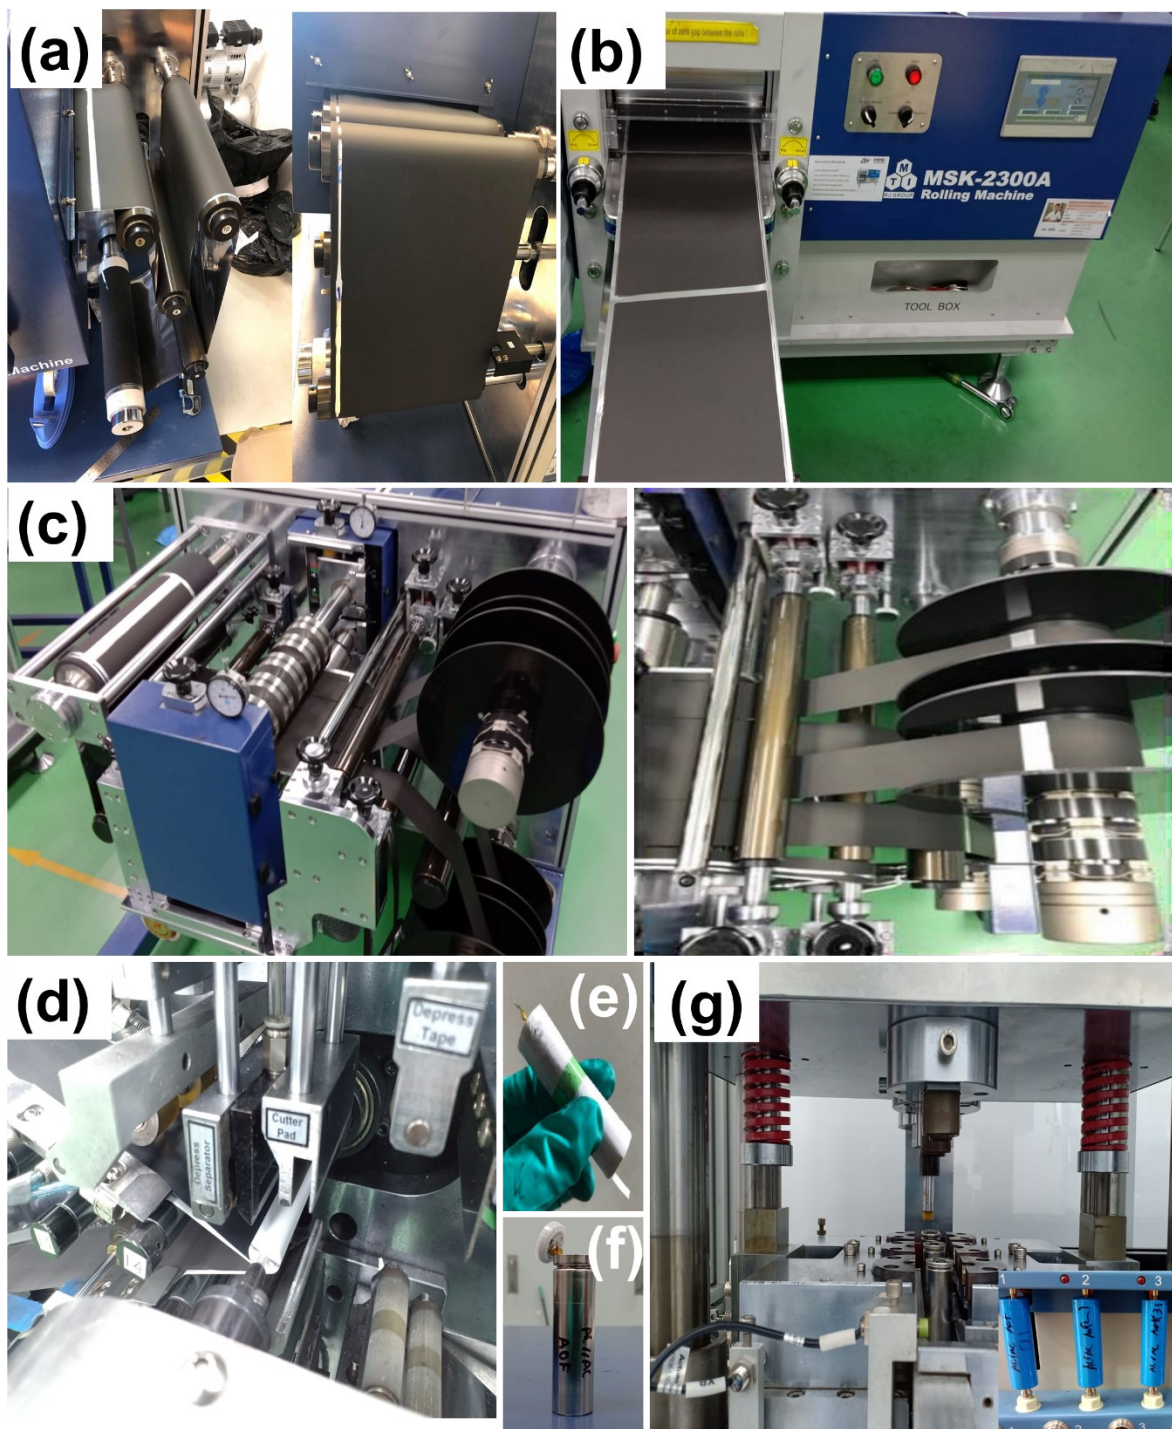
Fabrication process of 18650 cylindrical supercapacitor. (a) coating process, (b) calendaring of electrode, (c) slitting of electrode, (d) winding method, (e) as-winded electrode, (f) as-welded electrodes with the case, and (g) crimping of cell (inset; as-fabricated cell).
